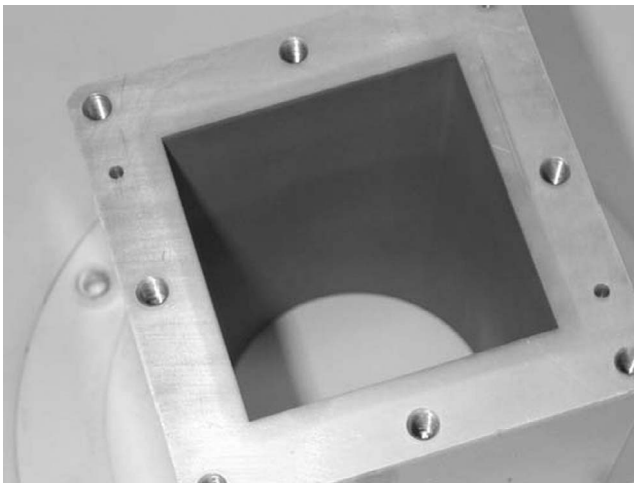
Soldered joint in a fabricated rectangular horn, showing use of reinforcement.
